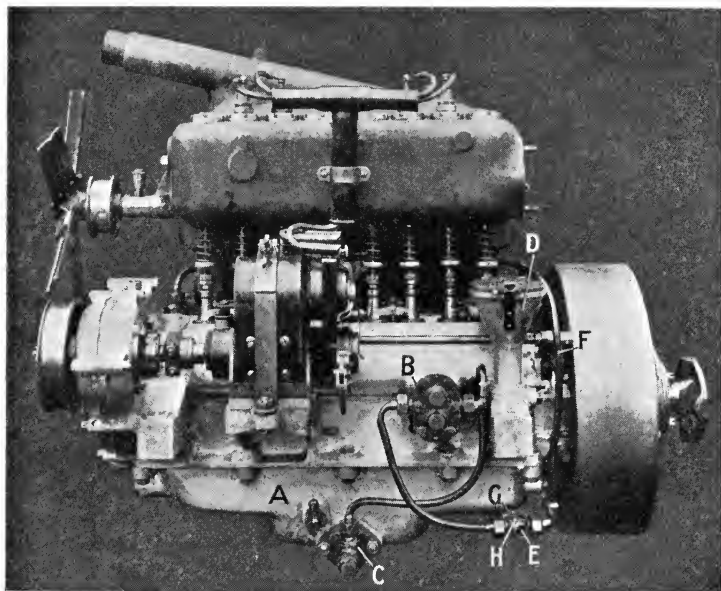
PRESSURE LUBRICATION SYSTEM, SHOWING OIL PUMP.
